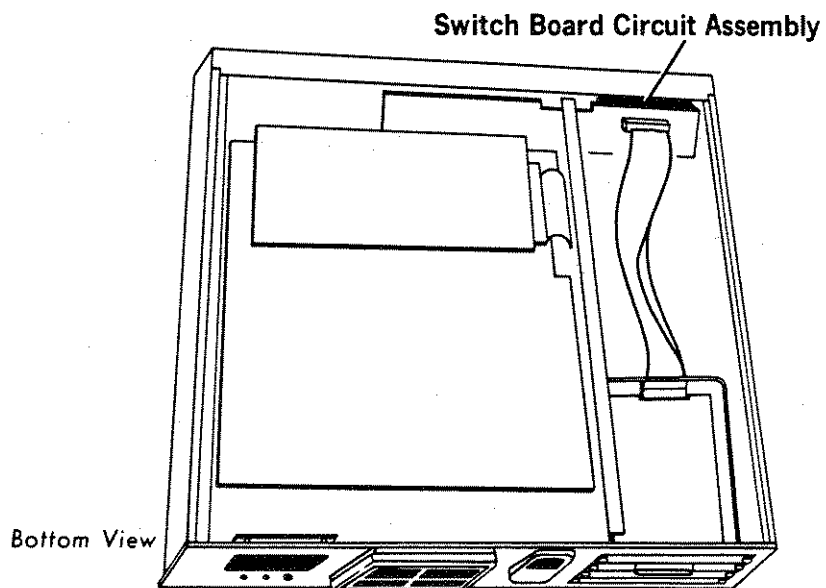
Location of Switch Board Circuit Assembly (P/N 59239)
